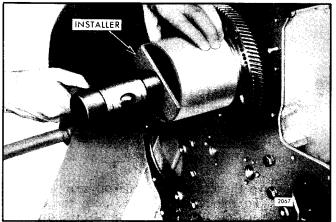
Installing Crankshaft Timing Gear using Installer J 7557
